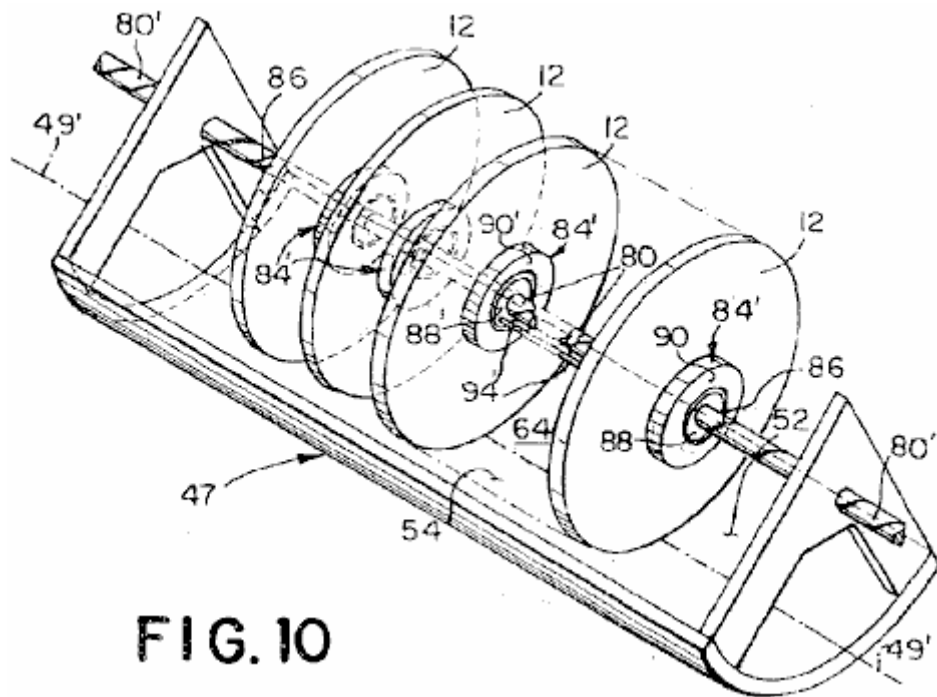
is a schematic perspective view of a twelfth preferred embodiment of the motor;
